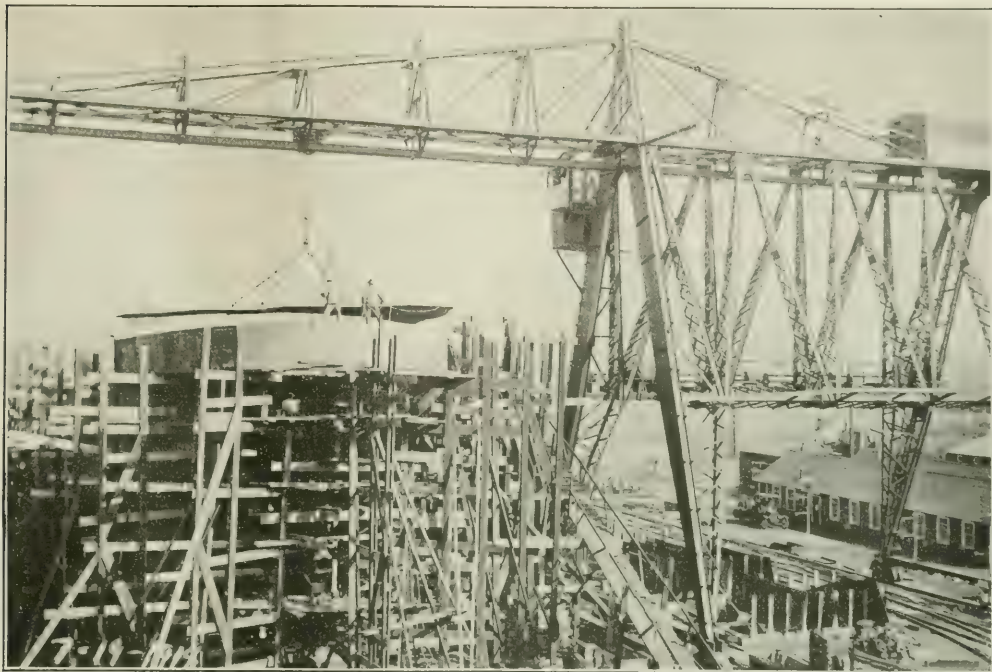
ASSEMBLY OF LARGE SECTIONS AT ECORSE—POOP DECK BEING SET AS A UNIT
